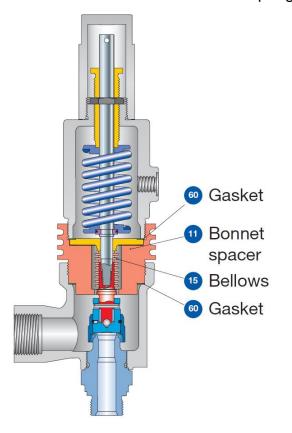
Parts of a balanced bellows spring loaded safety valve - threaded
